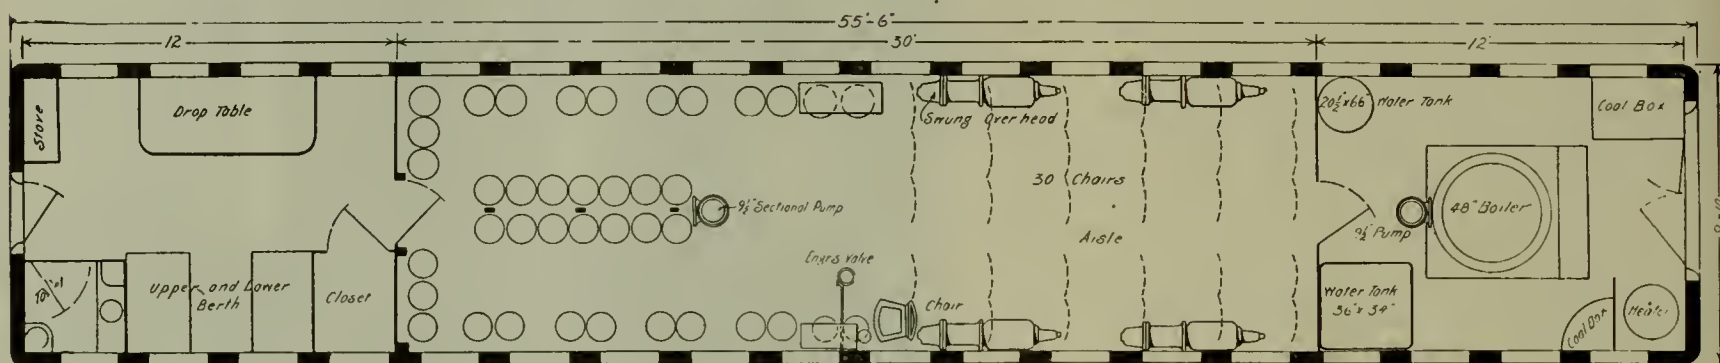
AIR BRAKE INSTRUCTION CAR, CHICAGO & NORTH WESTERN RAILWAY—PLAN.
